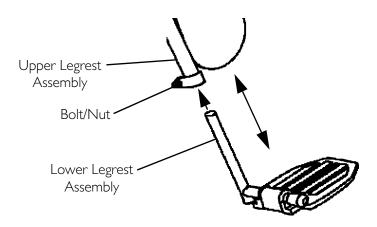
Adjusting Mechanical Elevating Legrests - Footplate Height
